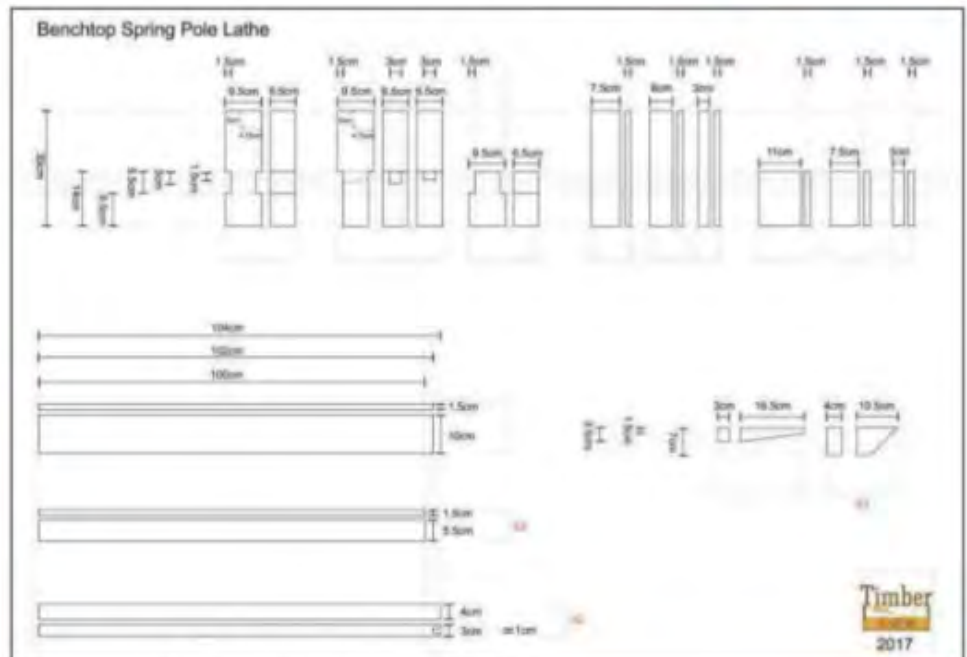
Dimensions for the portable bench-top spring pole-lathe
